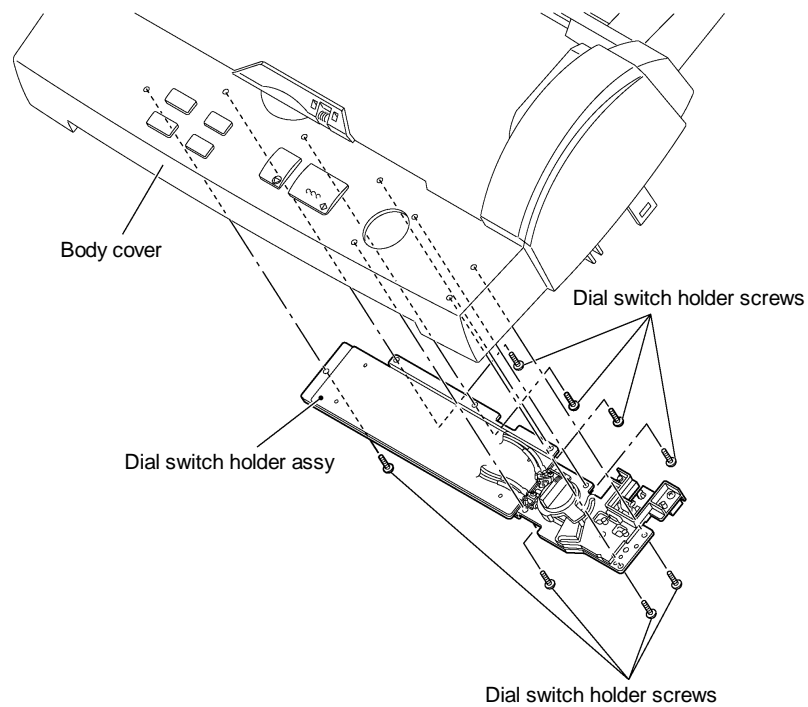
Installing the Dial Switch Holder Assy 4
